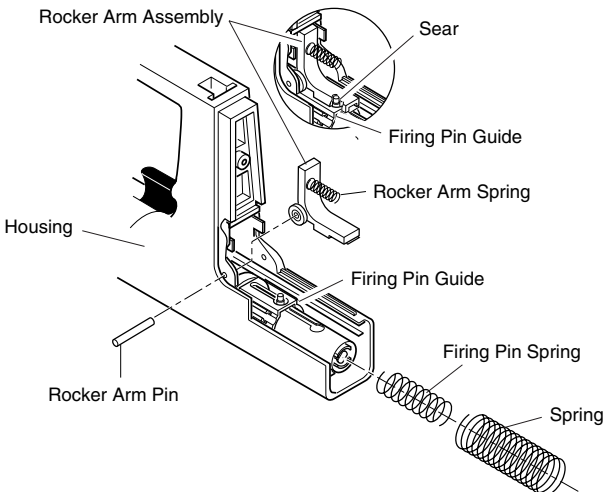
Replacing Firing Pin Guide, Firing Pin Assembly, Spring, Transfer Pin, and Push Pin
